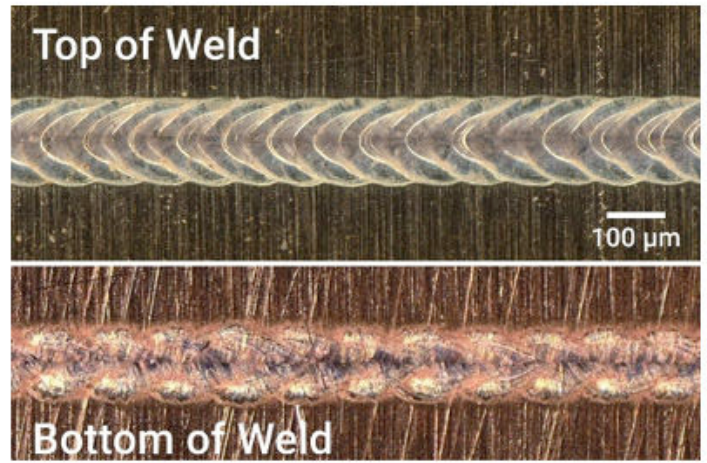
Top surface (top) and bottom surface (bottom) of a full penetration weld joining two 100 µm thick phosphor bronze plate. No spatter is seen
